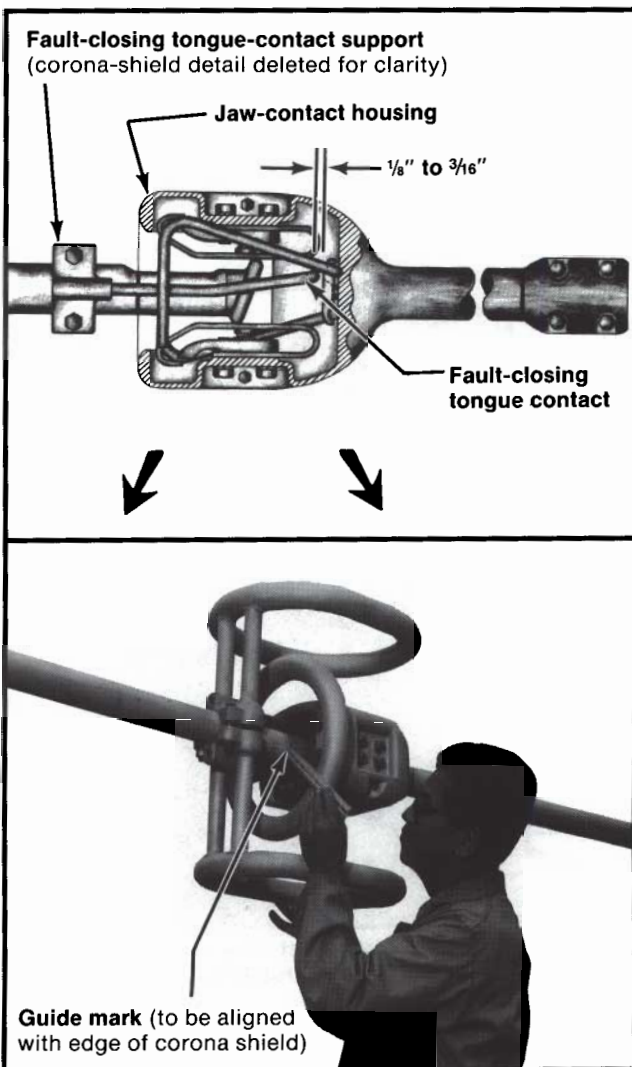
Checking for proper blade engagement (1600-ampere rating shown).
